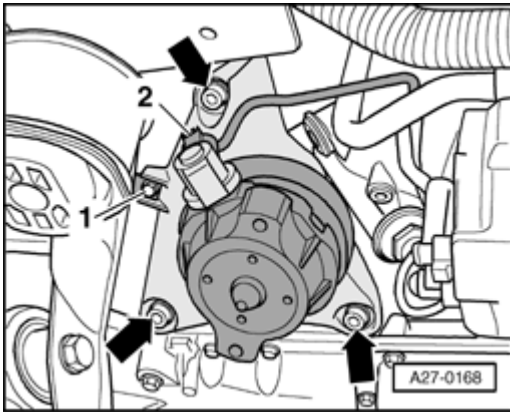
Disconnecting Electrical Connector On Engine Mount & Removing Cable Clip From Engine Support
